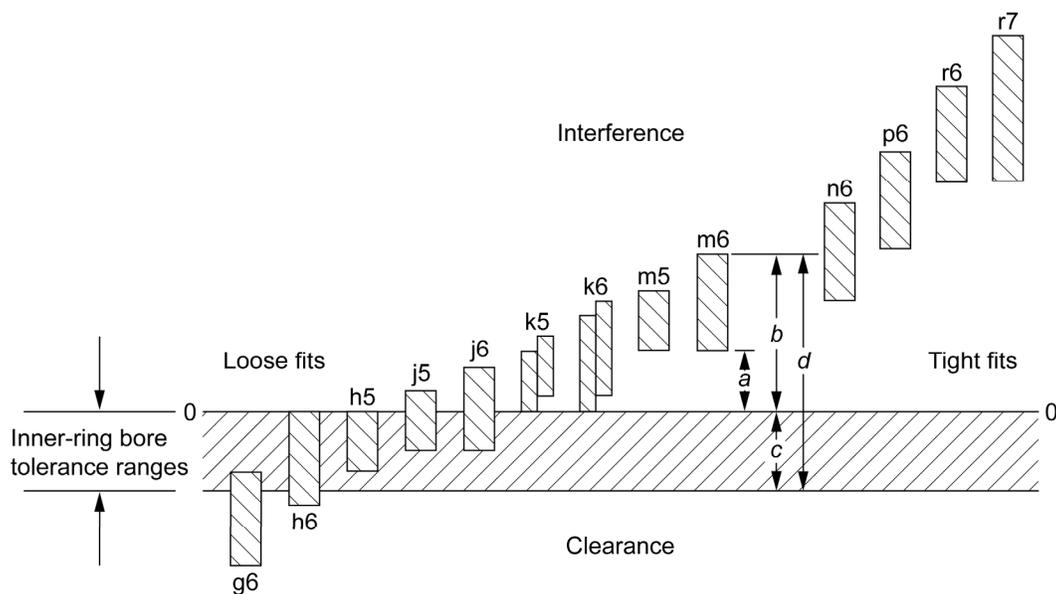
Representation of ANSI/ABMA shaft fits (adapted from ABMA (Ref. 1)). Dimensions illustrate m6 fit, with loosest fit within tolerance band represented by dimension *a* and tightest fit by dimension *d*. Fit classes j5 to p6 were considered in this report.
